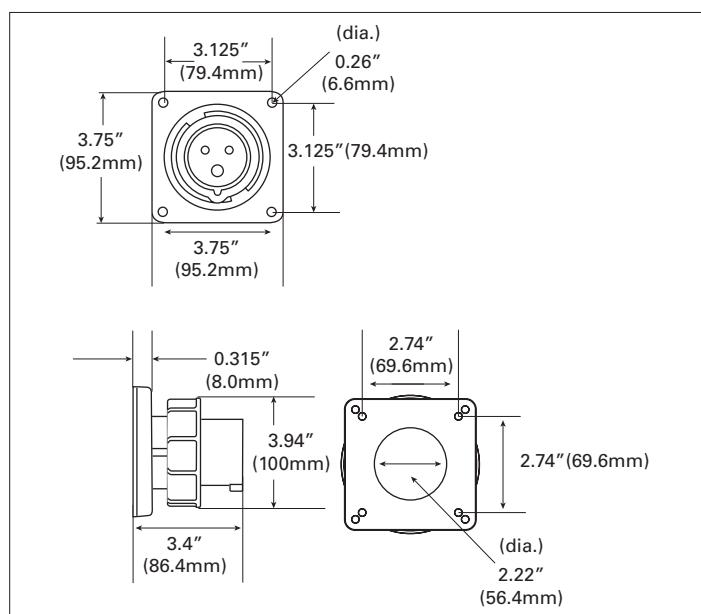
30A & 32A 4-P, 5-W Front, Side & Back View Inlets
